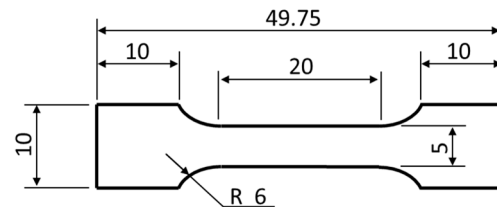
Microtensile specimen according to ASTM E8 standard, dimensions in millimeters.
